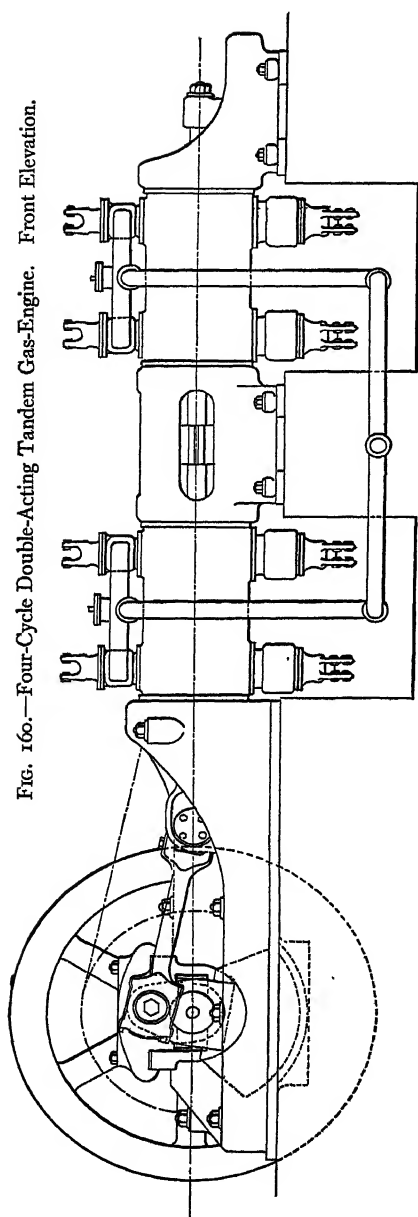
Four-Cycle Double-Acting Tandem Gas-Engine. Front Elevation.
